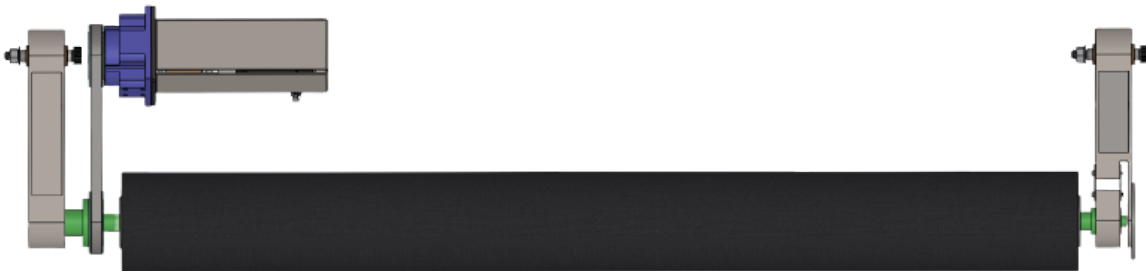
Isometric view of the CAD model of cleaning suspension and brush.
